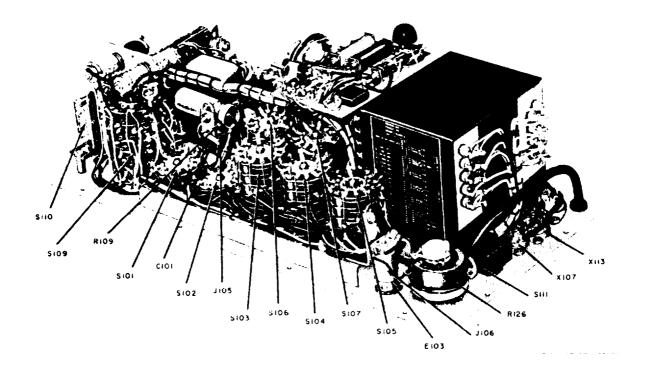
Test Set, Electron Tube TV–7/U, front-right oblique.
